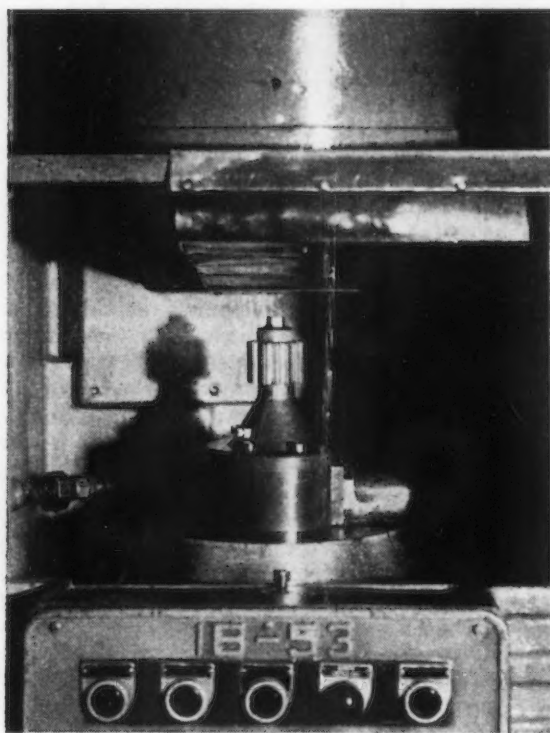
The *Shear-Speed* machine setup for cutting gear E in fig. 4.
